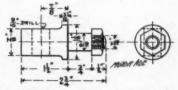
Cone Clutch Lever Swivel. 1—Steel.
